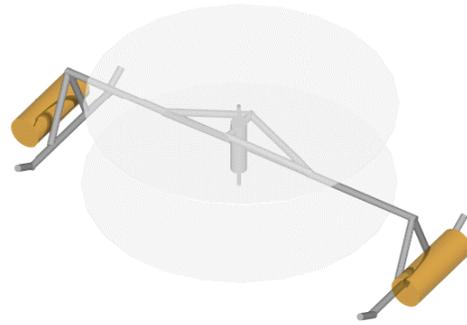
Coaxial Helicopter (MARTA) Demonstrator
